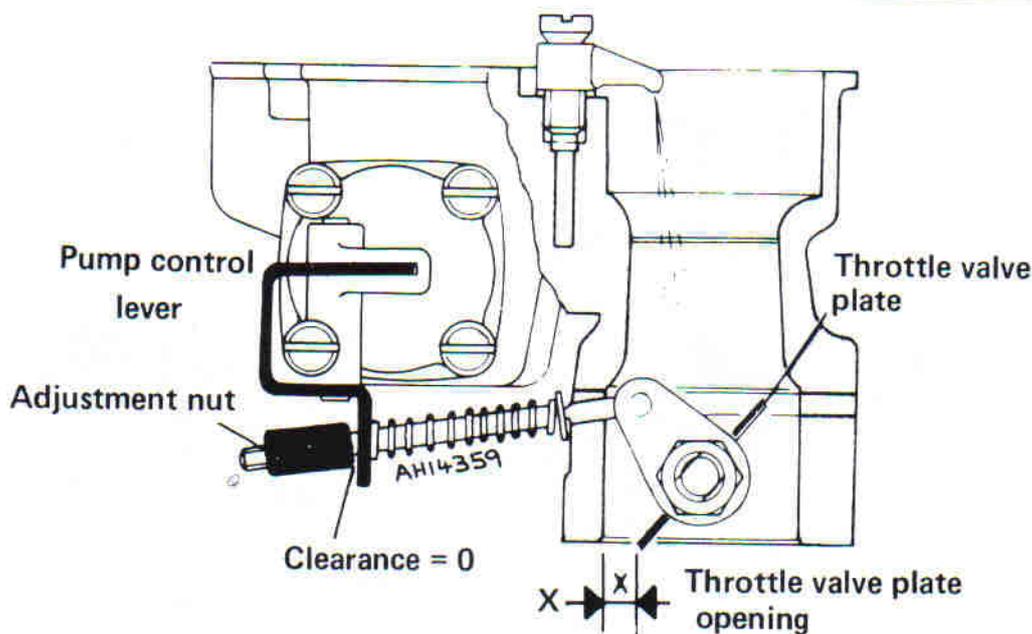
Accelerator pump setting diagram for IPM 32 MGV carburettor (Sec 11)
